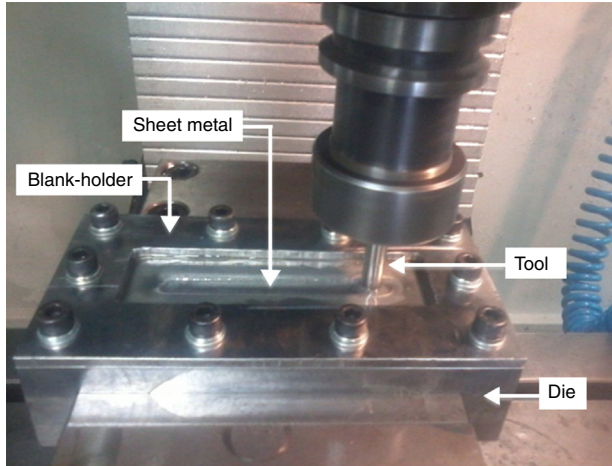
Incremental sheet forming process being performed at the CNC production center.
